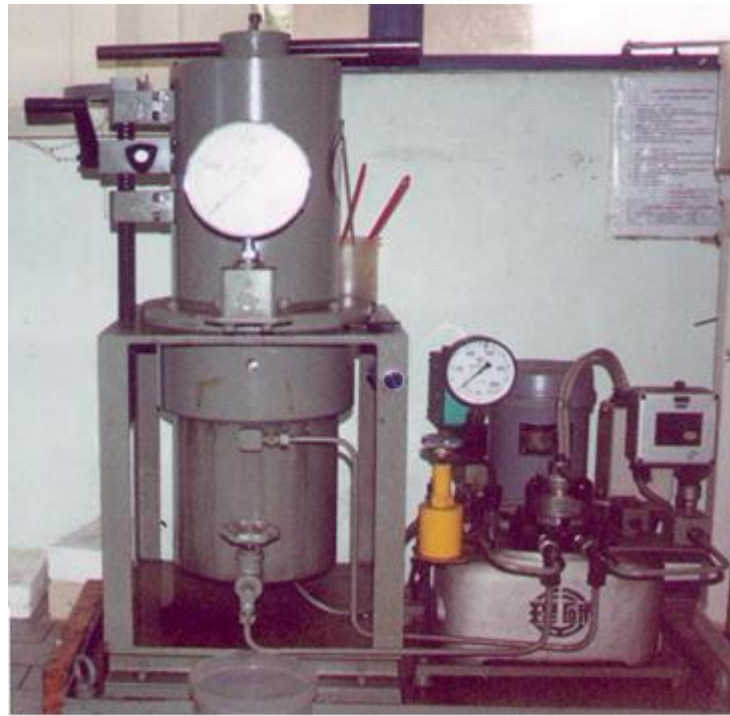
Cold Isostatic Press Machine (Reiken Seiki Japan)
